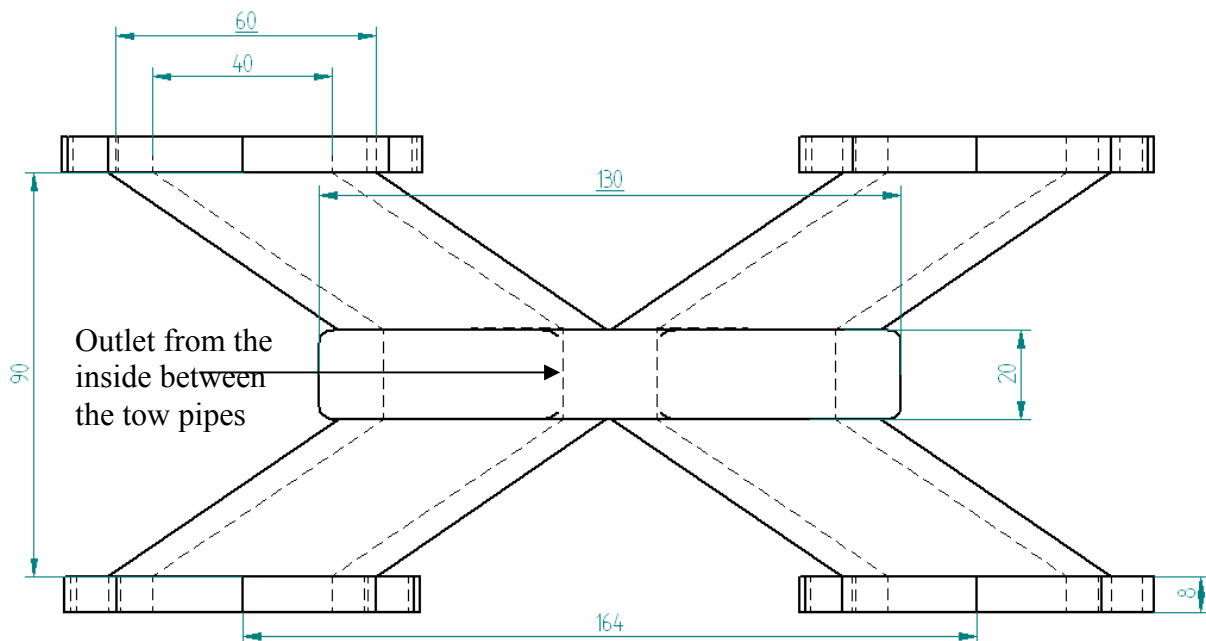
Shows the dimensions of the X-type manifold in [mm].
